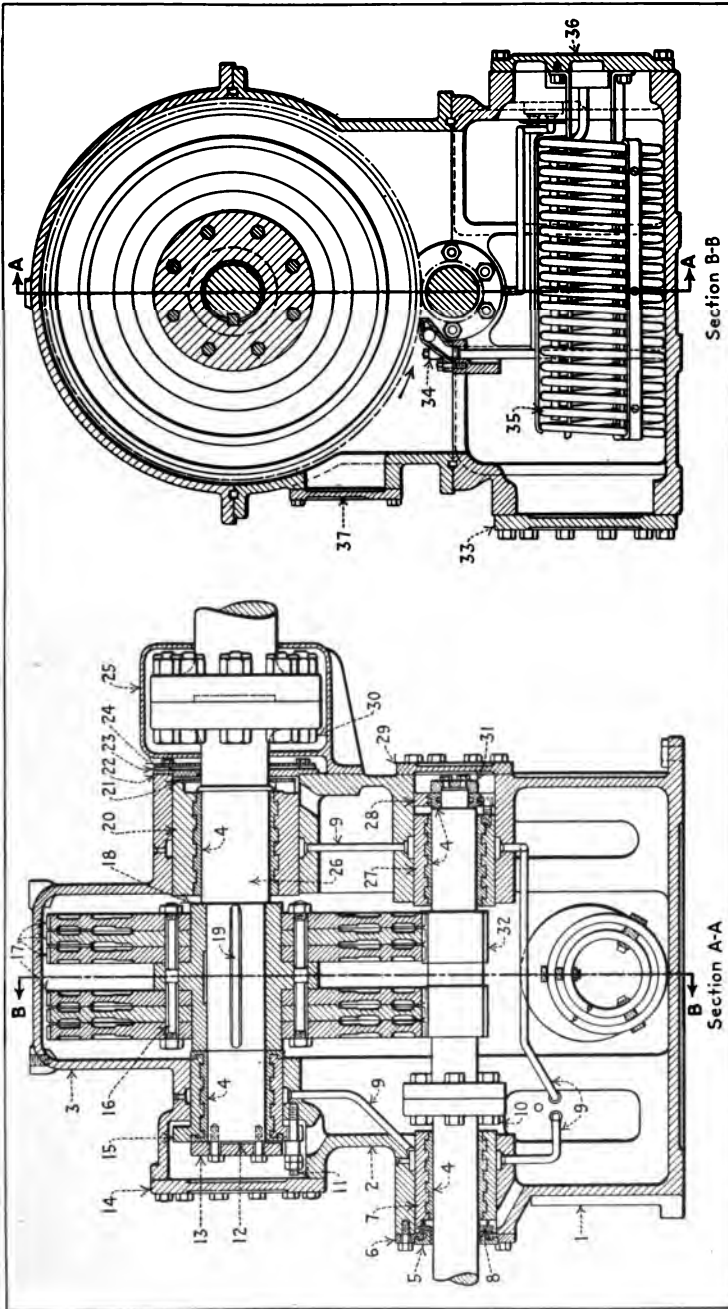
U. S. S. *Jupiter*: Sections Through Reduction Gearing of Auxiliary Turbo-Generator
